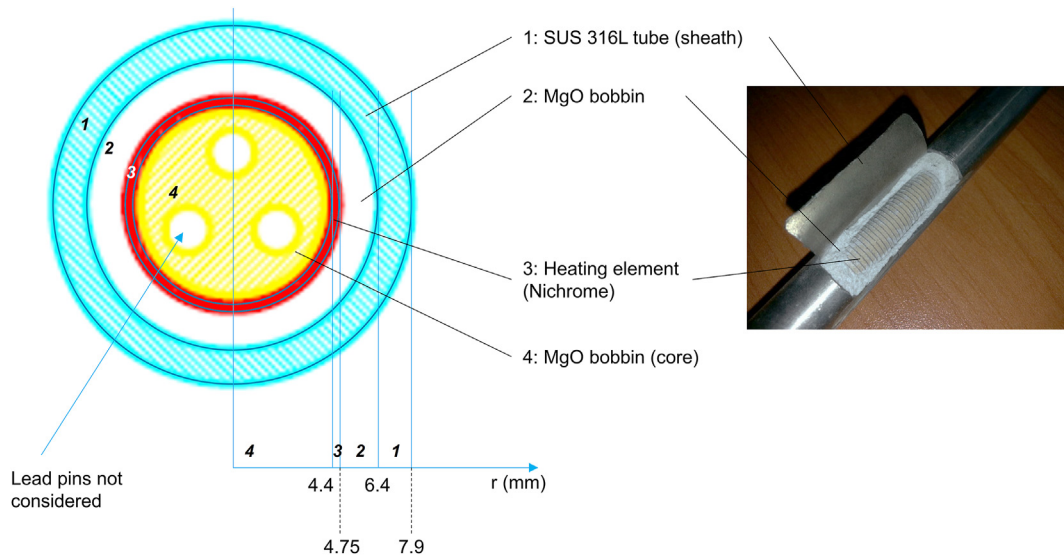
Cross-sectional design of a PILLAR heater rod (left) and cutaway view of an actual heater rod (right).
